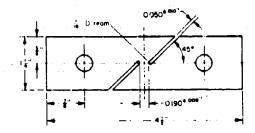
SHEET SHEAR TEST SPECIMEN
